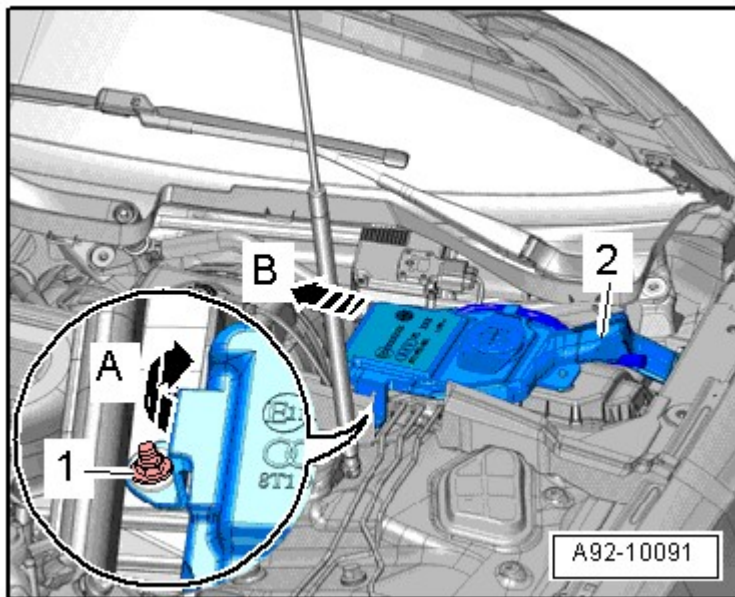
Identifying Filler Neck With Filler Tube From Washer Fluid Reservoir And Opening In Body
